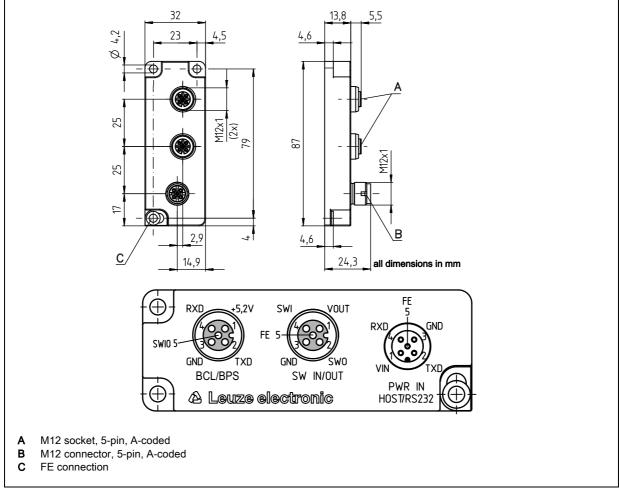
Dimensioned drawing and pin assignment of the MA 8.1 connection unit
